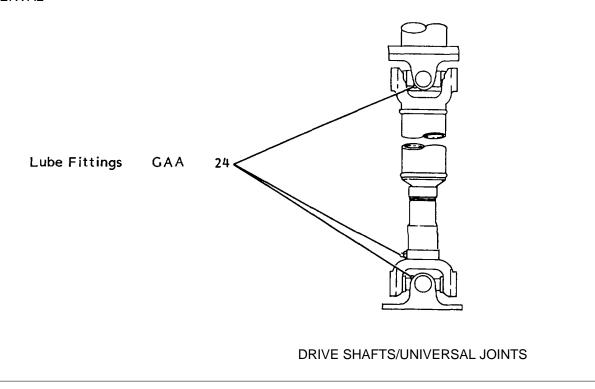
Lubrication Instructions for Drive Shafts and Universal Joints (Sheet 1 of 2)
